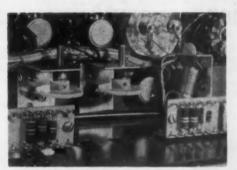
Nylon right angle gearing employed in Motorola tuning drive provides high ratio in compact space.
